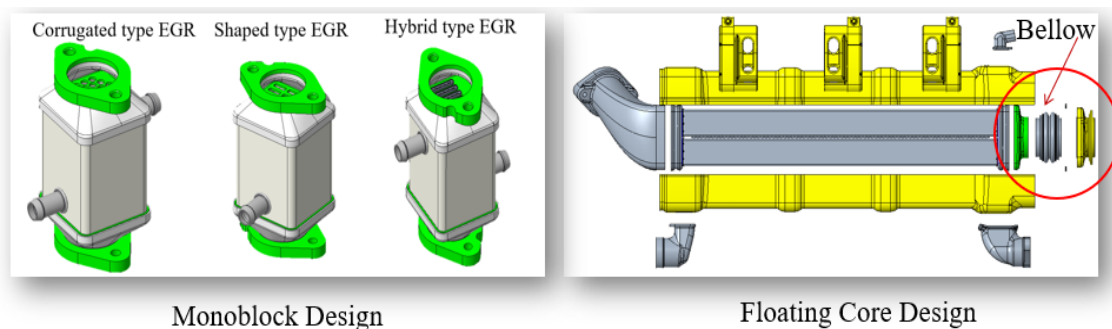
Monoblock, floating core & manifold design, EGR Cooler construction.
